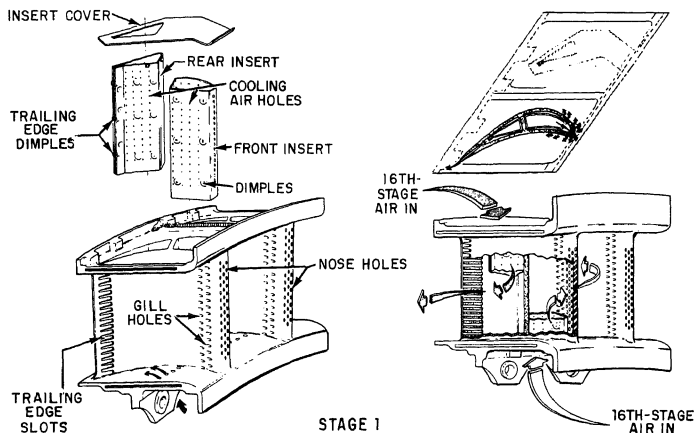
First-stage gas generator turbine nozzle cooling.
